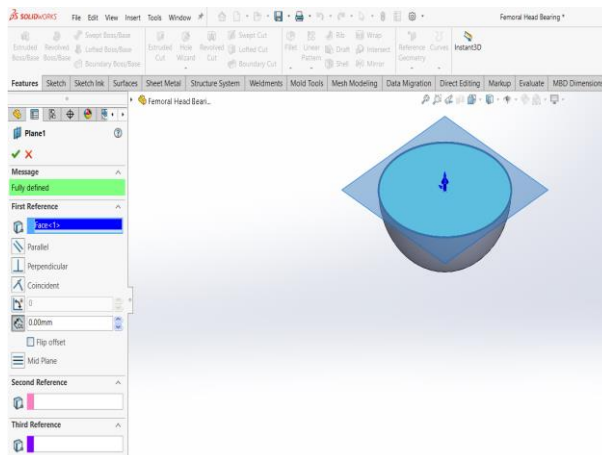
Creating a new plane on the bottom surface of the Femoral Head Bearing solid model
